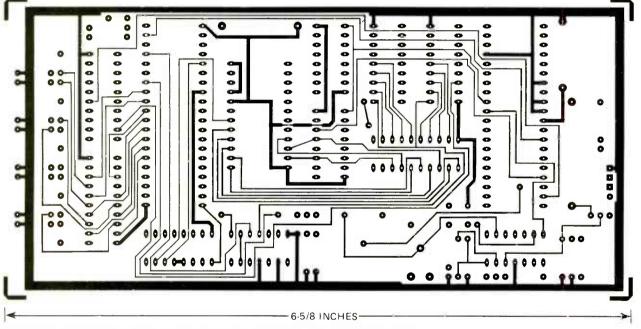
"BOTTOM" OF PC BOARD. Keypad and voltage regulator will be mounted from this side.
